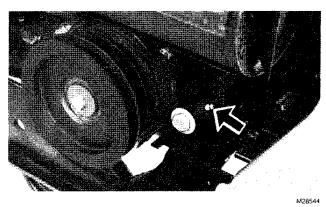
Hanger Spacer Fitting on 200 Series Tractors (Serial No. 190,001-)
